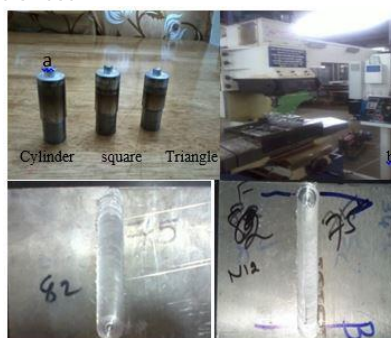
(a) Tool pin profile, (b) FSW setup, (c1&c2) single pass and Multipass FSW welded plates
